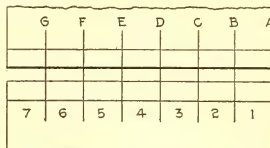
METHOD OF BACK-STEP WELDING
